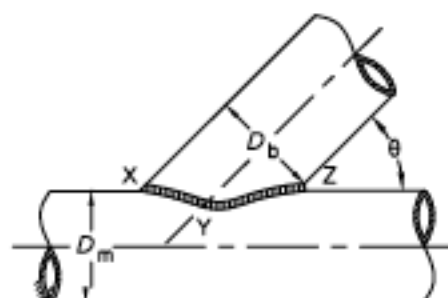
PREQUALIFIED BUTT WELDS FOR CIRCULAR AND UNEQUAL-WIDTH RECTANGULAR HOLLOW SECTIONS
